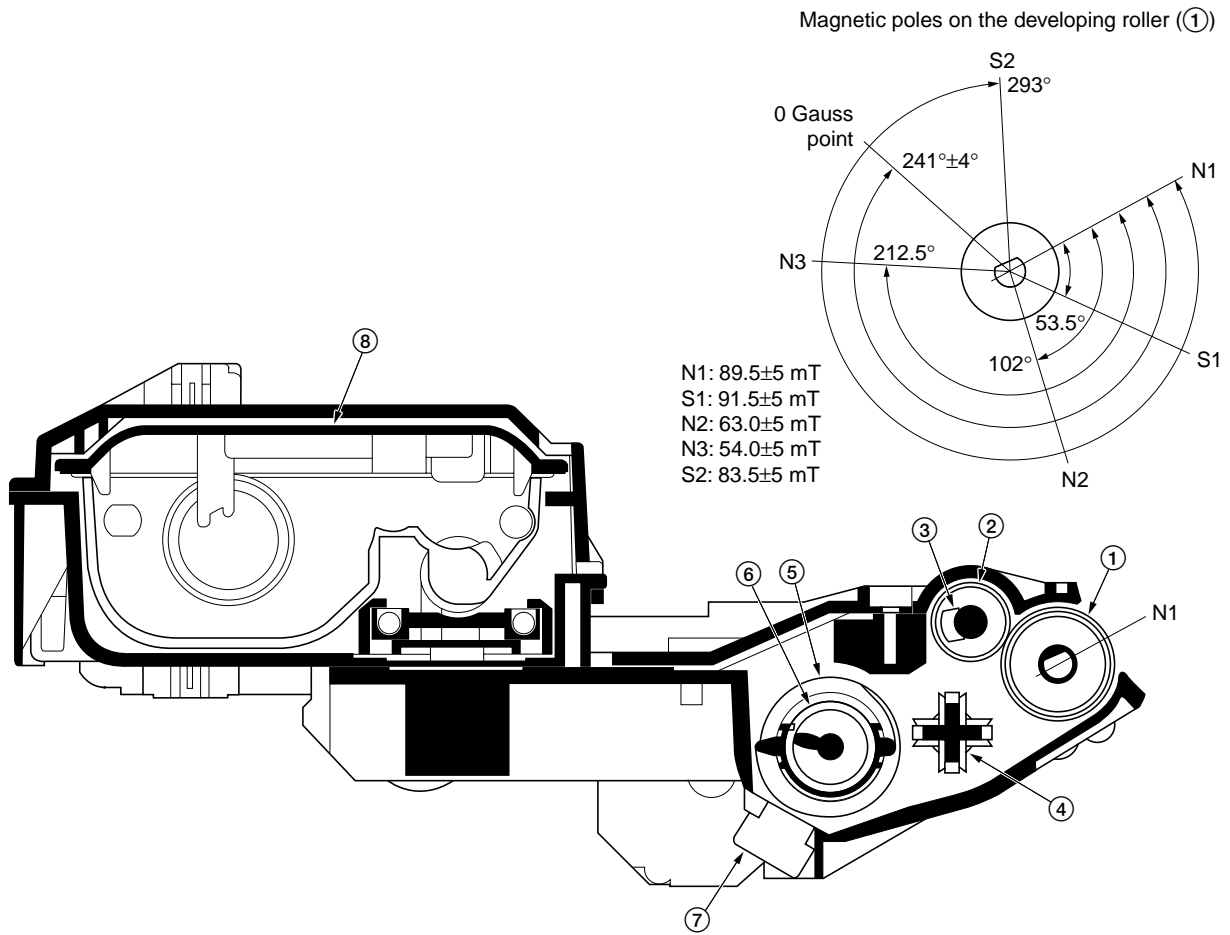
Cyan developer and magnetic poles on the developing roller
